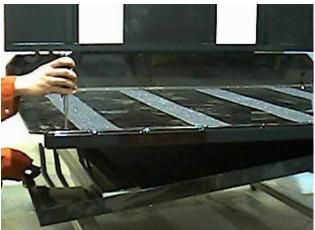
A- LOWER SAFETY PAN TO ACCESS BOLT HOLES
